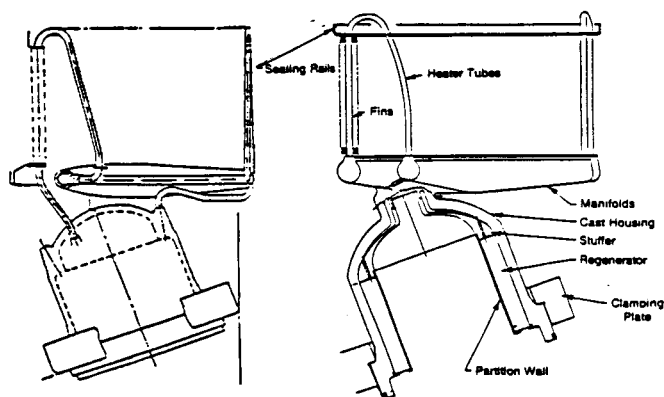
Comparison of Double and Single Manifold Heater Head Designs
